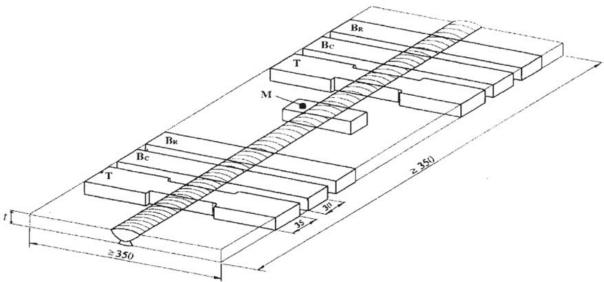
(2) Edge preparation and size of deposited metal test assembly
